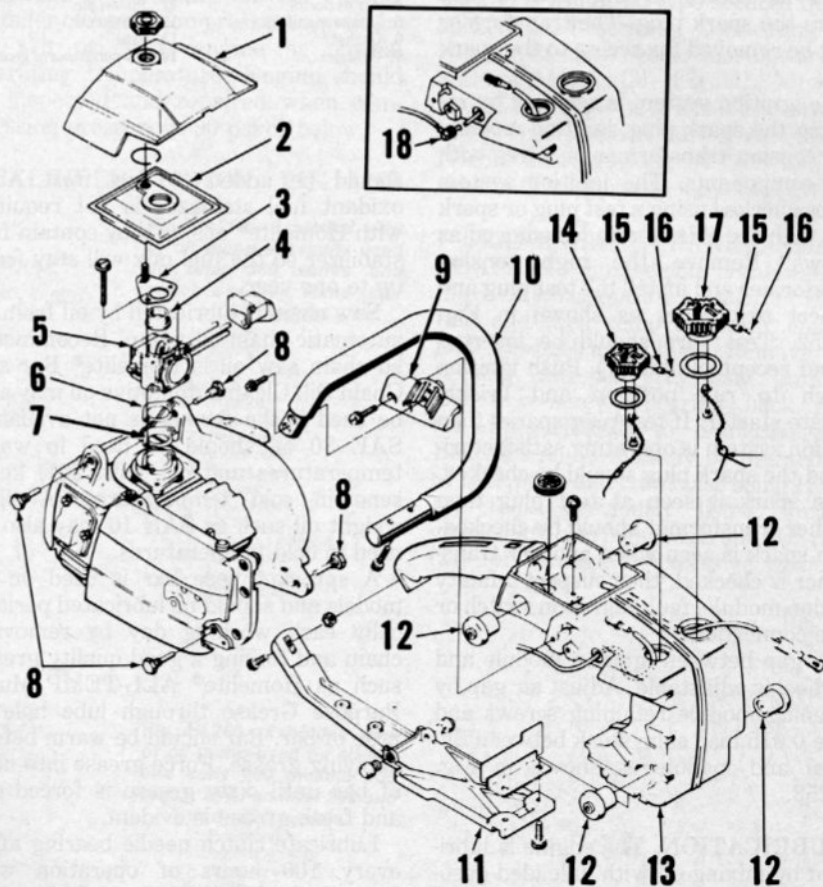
Exploded view of engine housing assembly. Some housings will use a threaded elbow fitting (18) on oil pickup tube as shown in inset.
